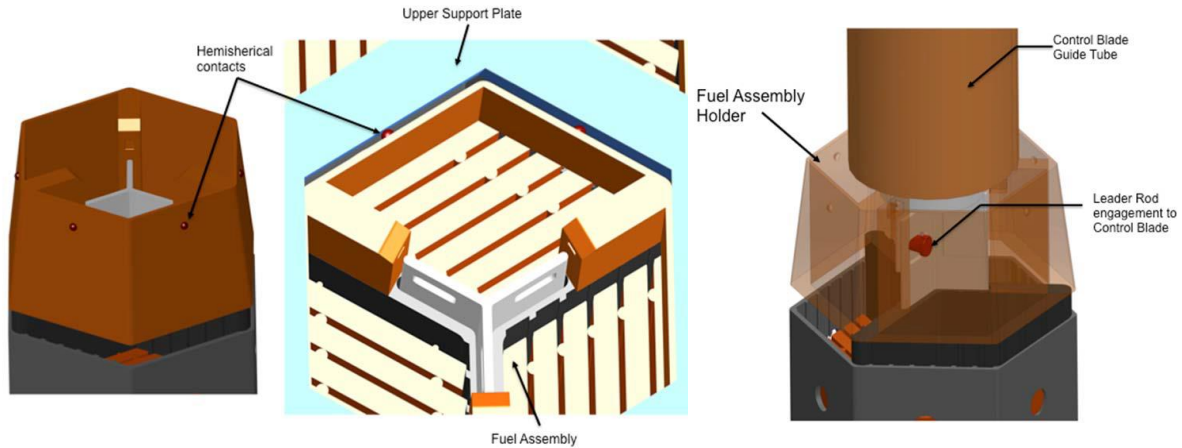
Fuel assembly grappling collar, upper core support plate and control rod drive mechanism details [2]
